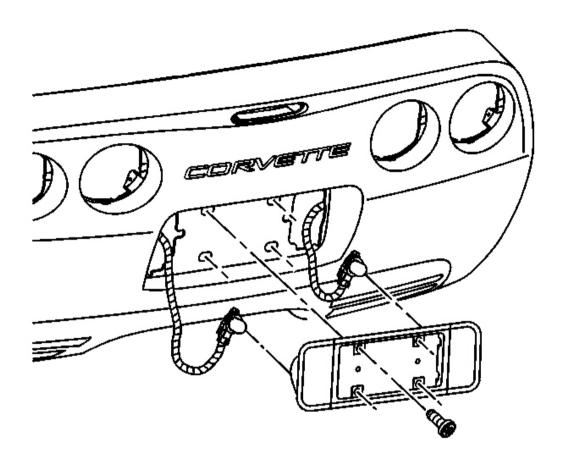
Backup Lamp Assembly To Vehicle Courtesy of GENERAL MOTORS CORP.
